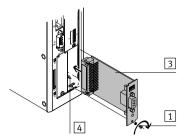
Mounting or dismantling (example CAMC-PB)
